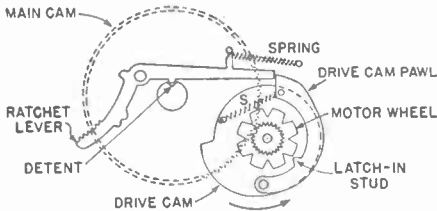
The ratchet lever holds the drive-cam panel away from the motor wheel until the trip mechanism is actuated.
